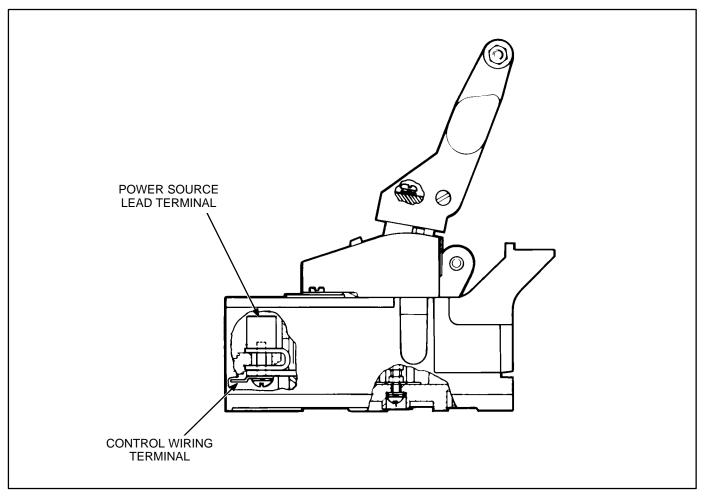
CONTROL WIRING TERMINALS (40 TO 125 AMPERES)
